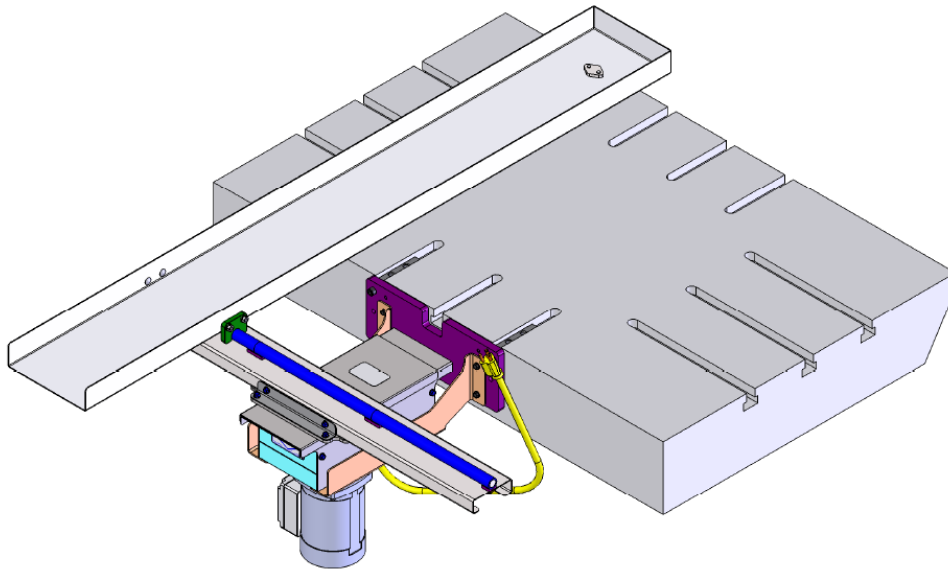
EGD-050 MOUNTED TO T-SLOTTED TABLE, SHOWN WITH 12" MOUNTING BRACKET AND 3/4" TEE NUTS
